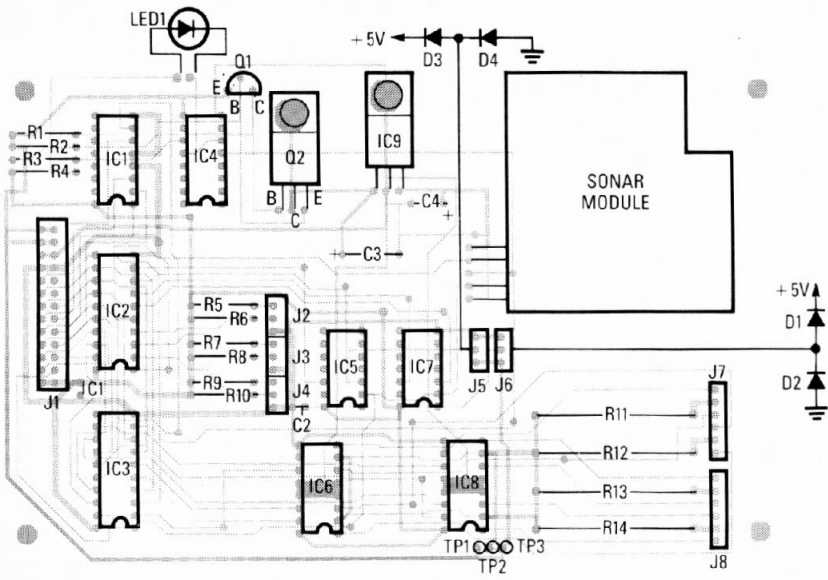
ALL OF THE HEAD'S ELECTRONICS are mounted on one double-sided PC board.
